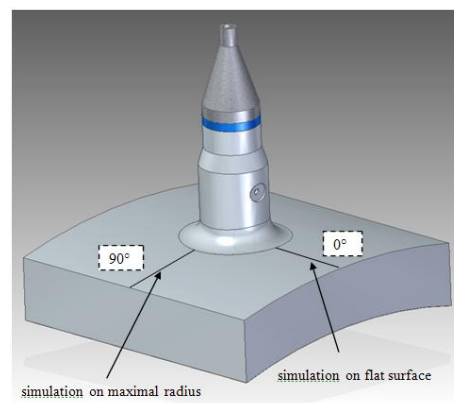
3D drawing of the pressure measurement piping nozzle to WWER 1000 primary circuit Dn 850 piping weld test assembly
